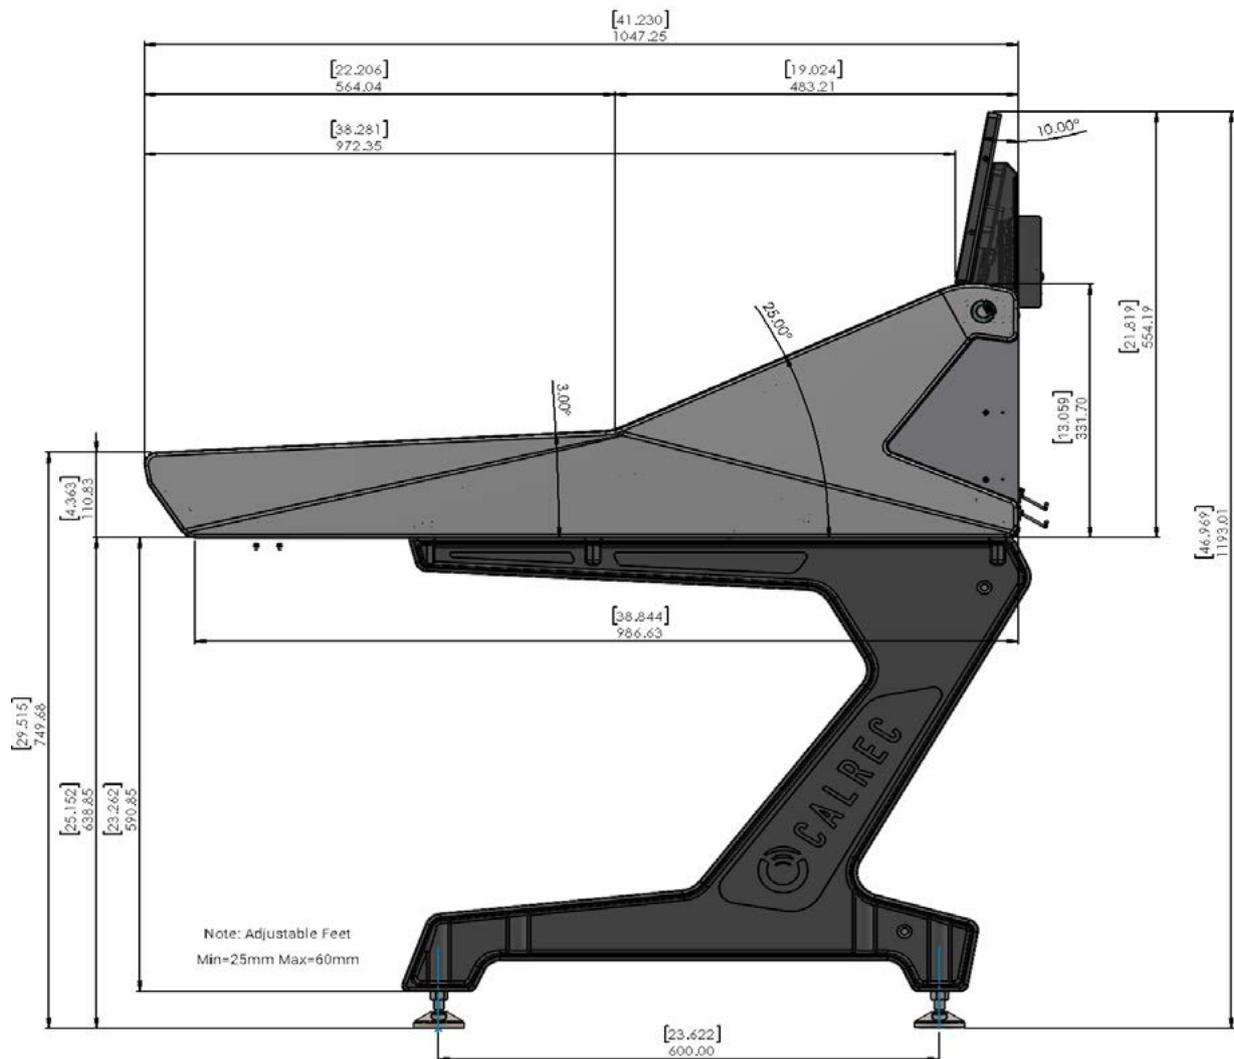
FLOOR STAND FITTED ADJUSTABLE FEET, END ELEVATION ARGO Q
